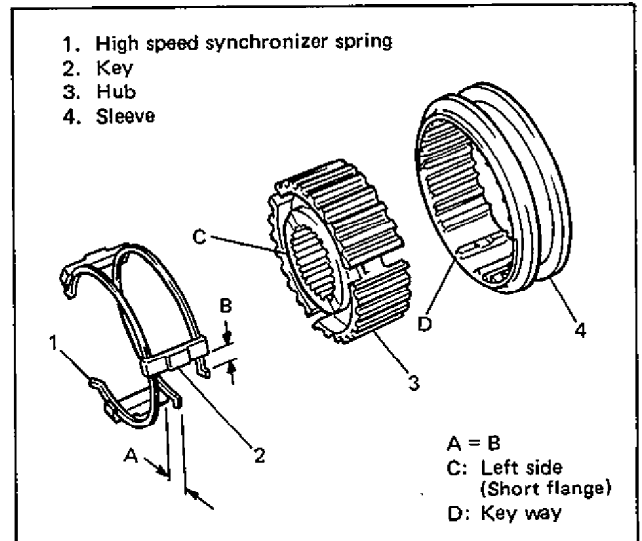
A-51 Assembling High Speed Sleeve & Hub
